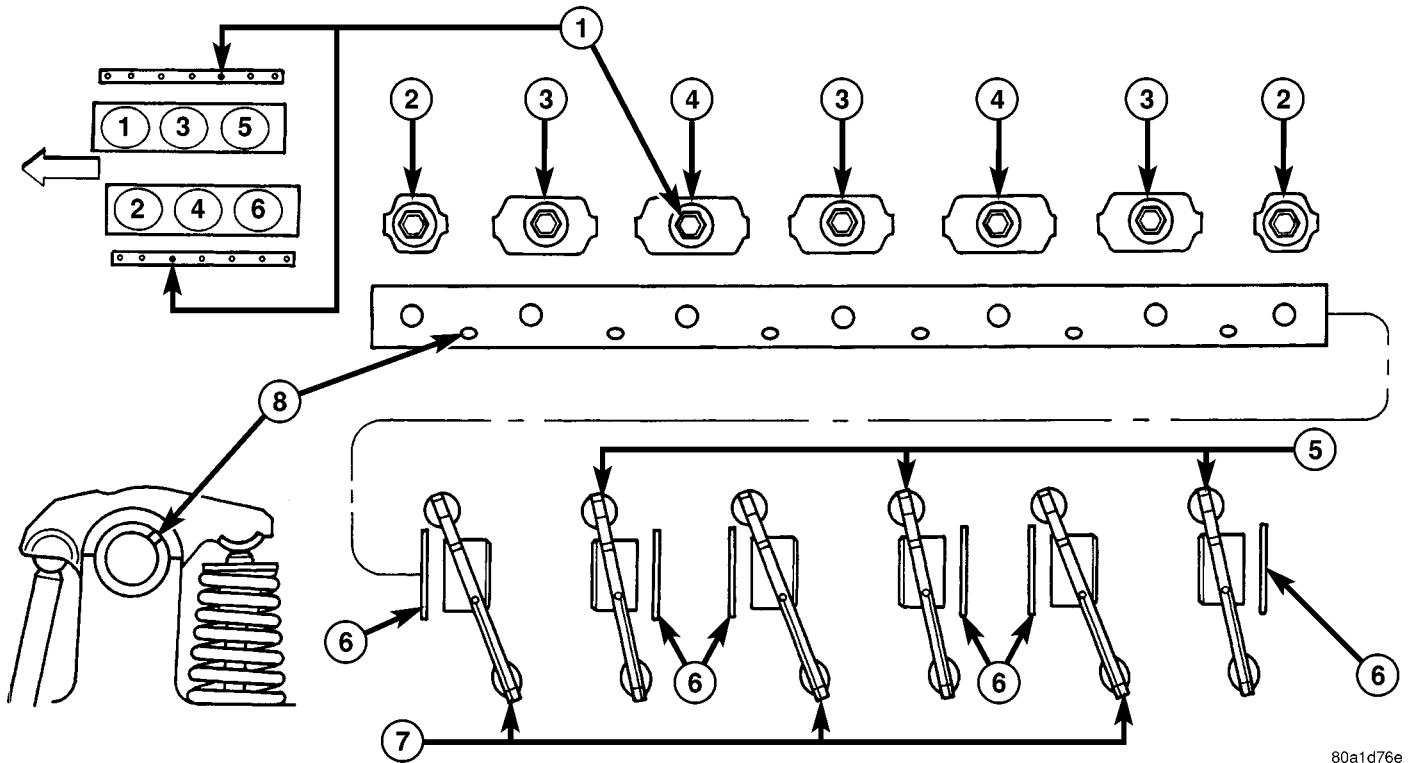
ROCKER ARM RETAINER - REMOVAL
